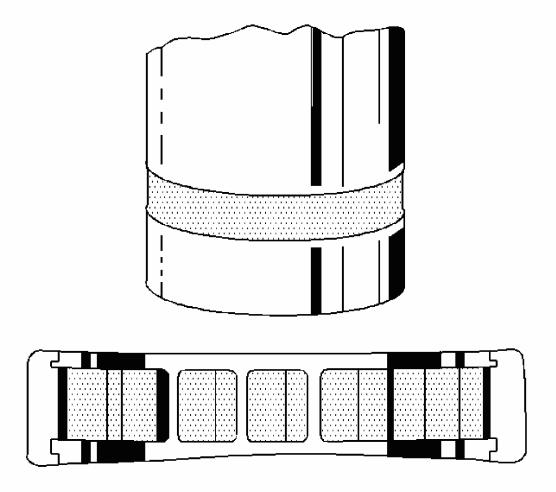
Identifying Major Wear Courtesy of GENERAL MOTORS CORP.
